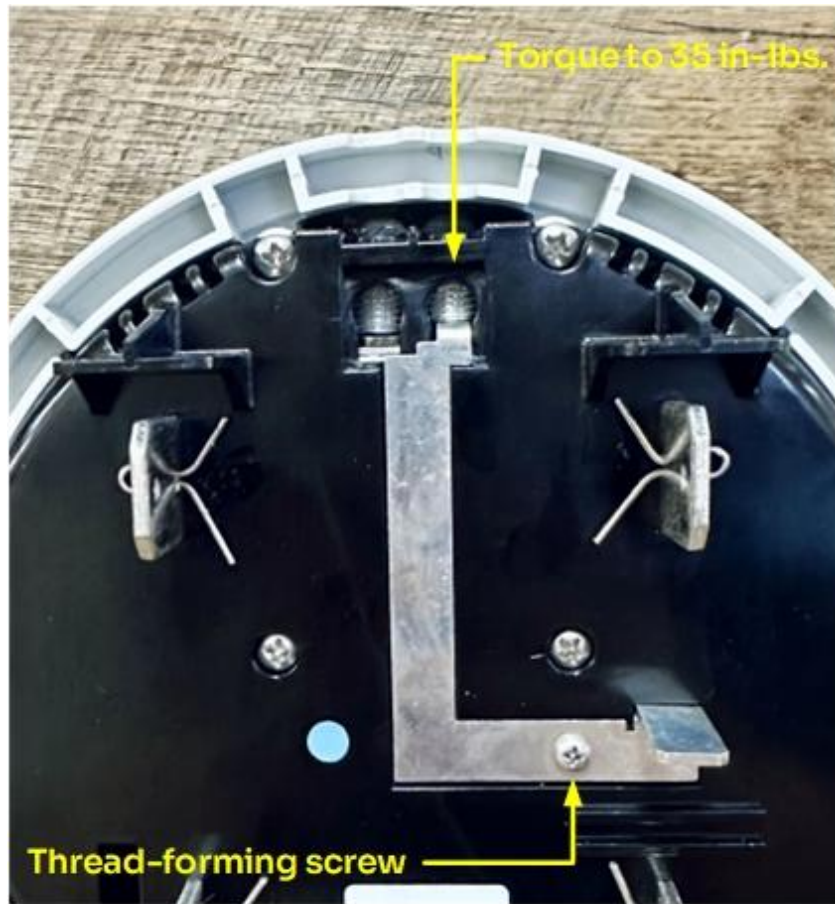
5th Stab Completely Installed on the back of the MSA Base.
